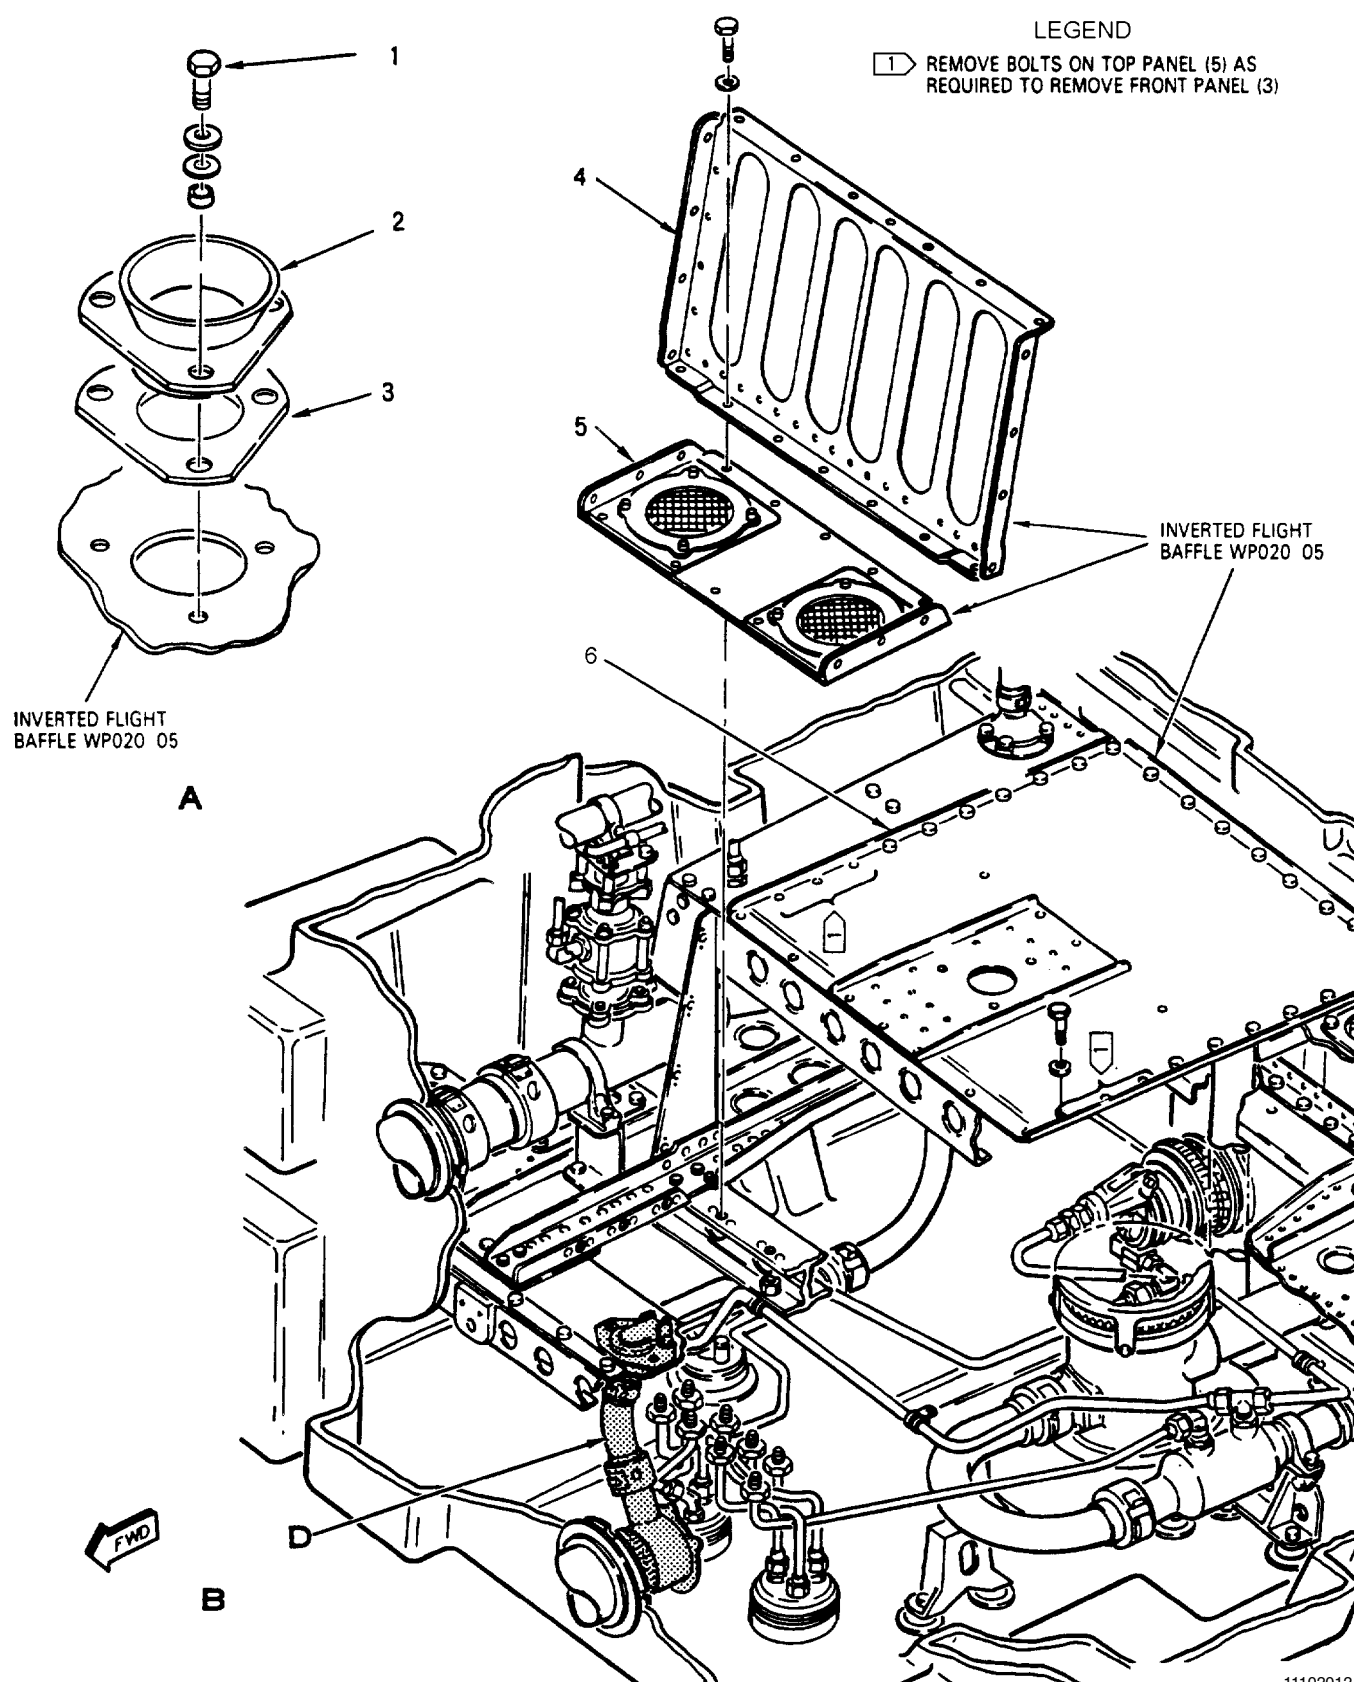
No. 2 Fuel Tank Gravity Feed Check Valve (5VAP600) (Sheet 1)
